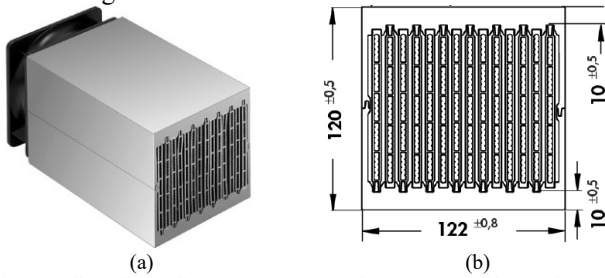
Hollow-fin cooling aggregates. (a) The prototype of heatsink; (b) Cross-section layout of heatsink
